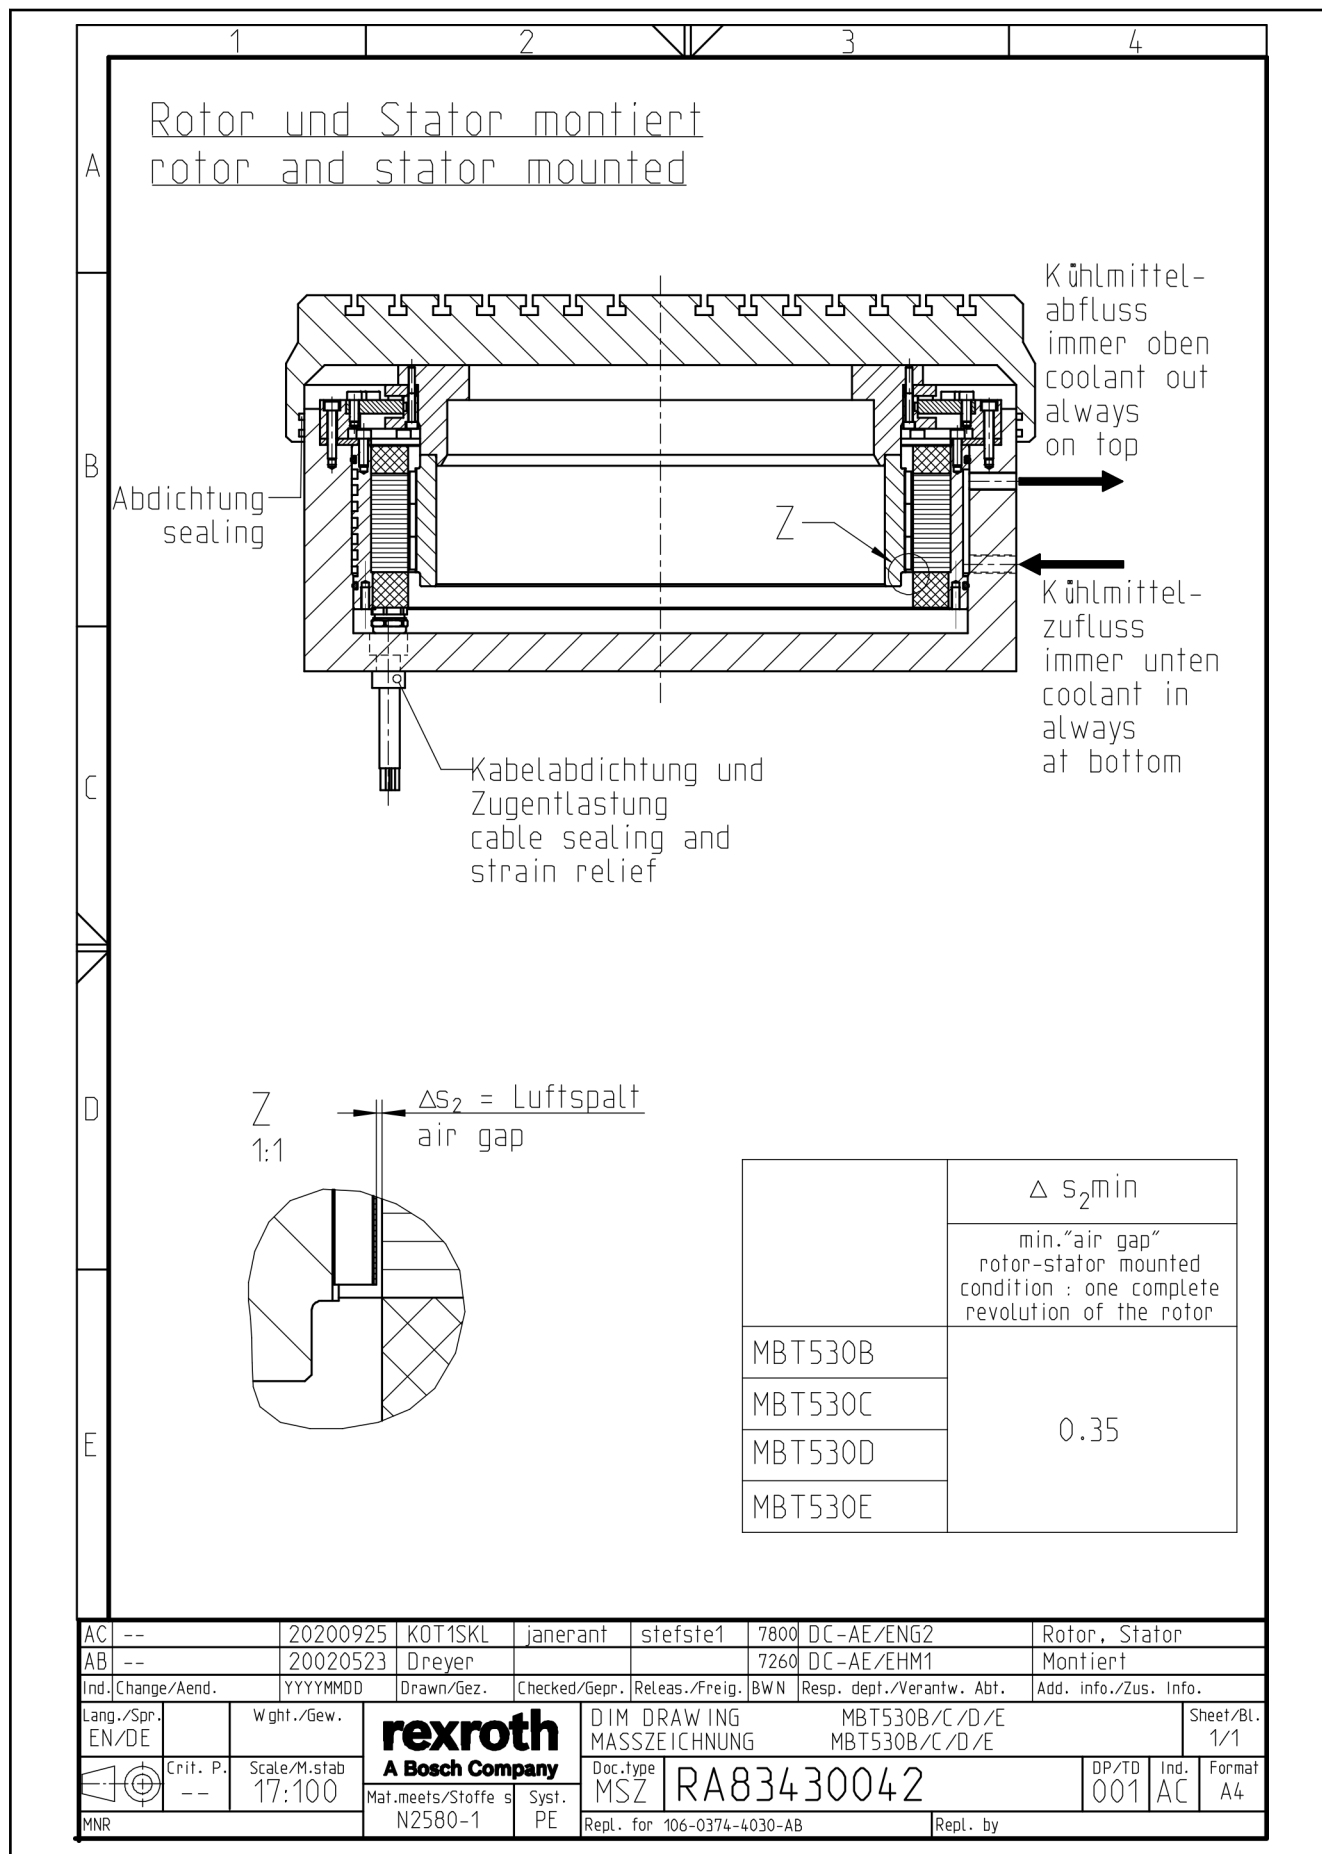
Frame size 530B/ -C/ -D/ -E, rotor and stator mounted
